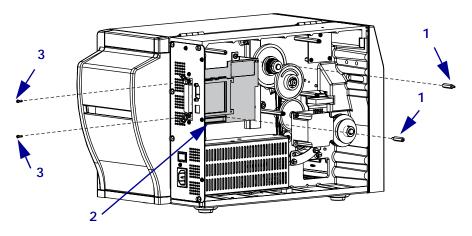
• Install/Remove the Internal ZebraNet PrintServer Board or the Parallel Port
